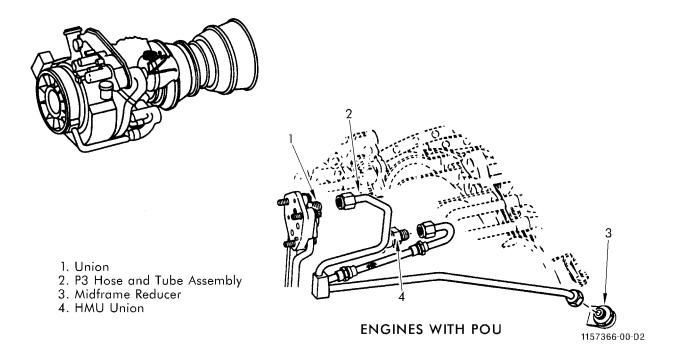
(T700) P3 Hose and Tube Assembly; Removal and Installation
